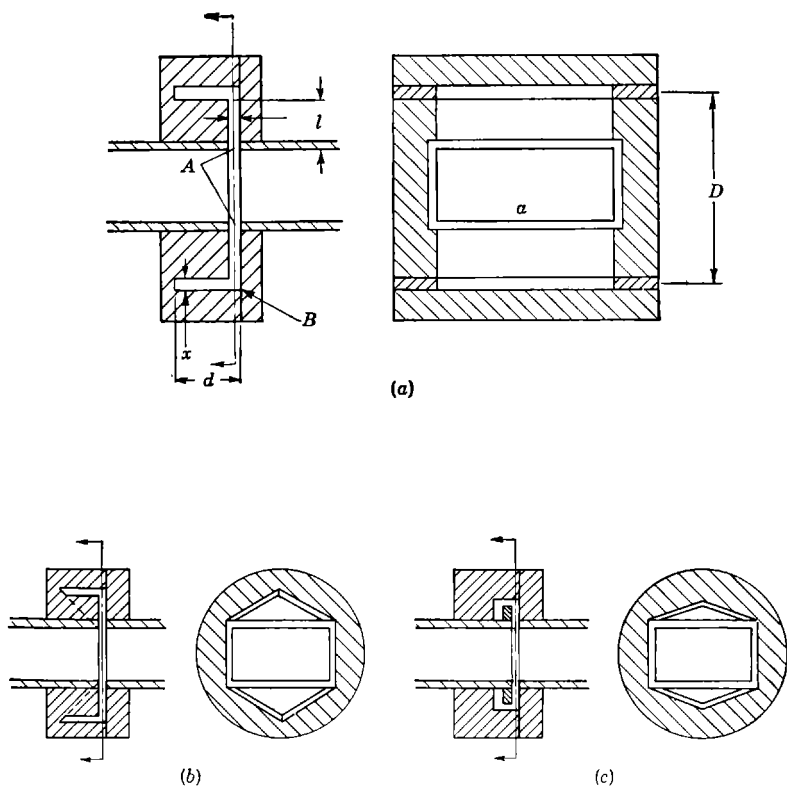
Other choke couplings. (a) British-choke coupling. (b) and (c) Chutype choke coupling; (b) is a variable-groove-depth type and (c) is a fold-back type.
